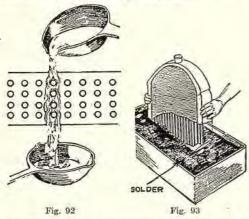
Illustrating how solder is poured over the leaky radiator tubes.
